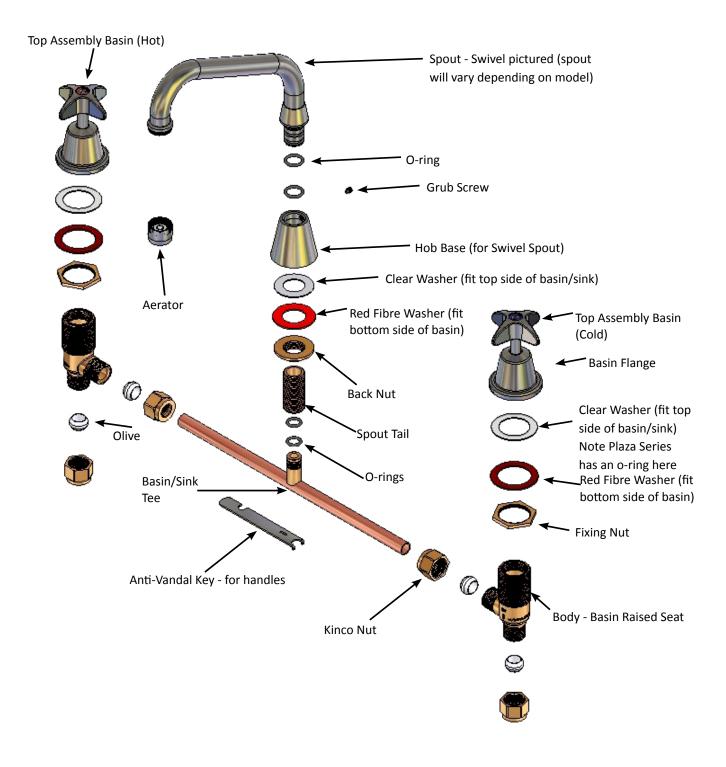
Exploded component view | Shown with VP handles and 307 sink spout | Handle type or spouts will vary between models
